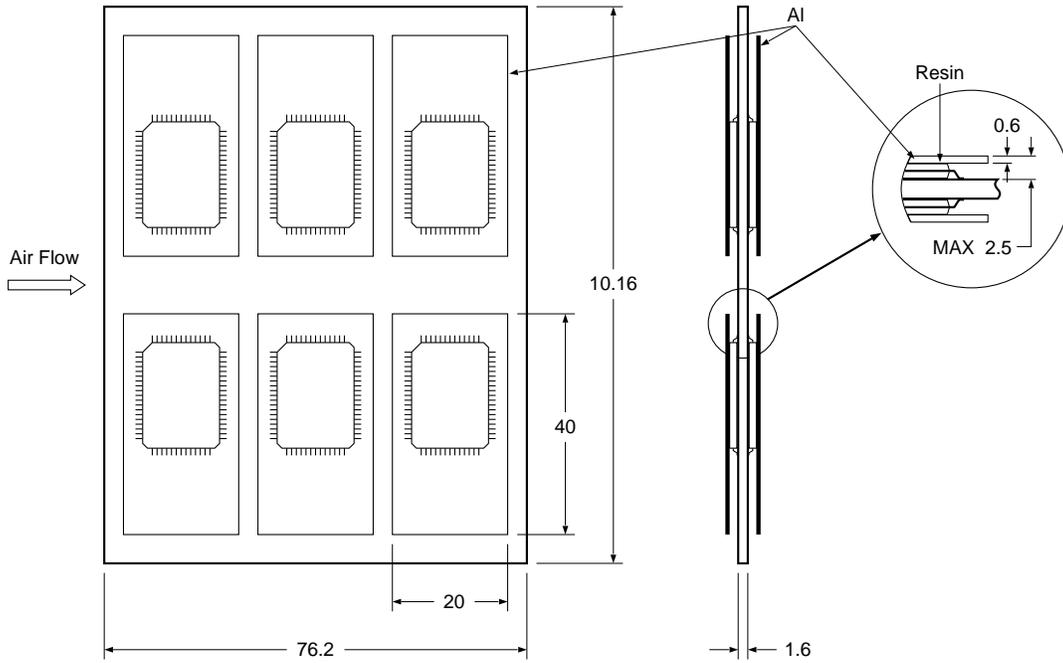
Mechanical drawing of the mounting, with heat sink
